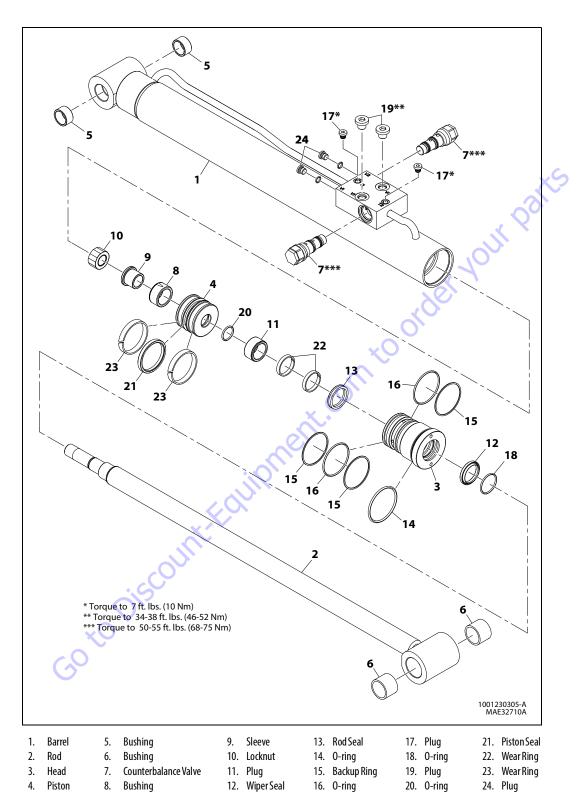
Jib Lift Cylinder (China Built Machine)
